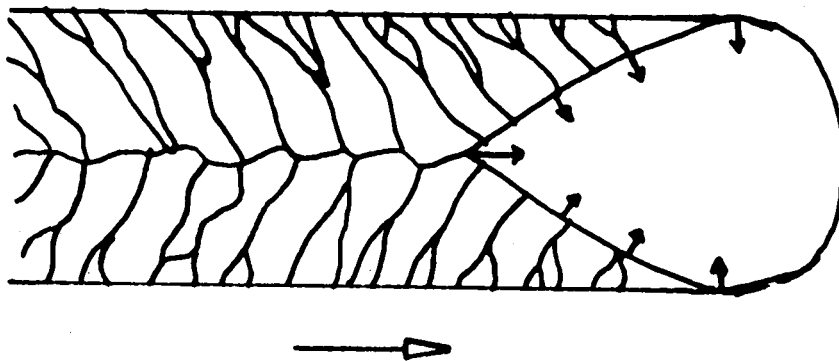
(b). Tear-shaped weld pool, higher welding speeds. Direction of maximum thermal gradient almost invariant, so that fewer grains survive to weld centre, as competitive growth can occur.
